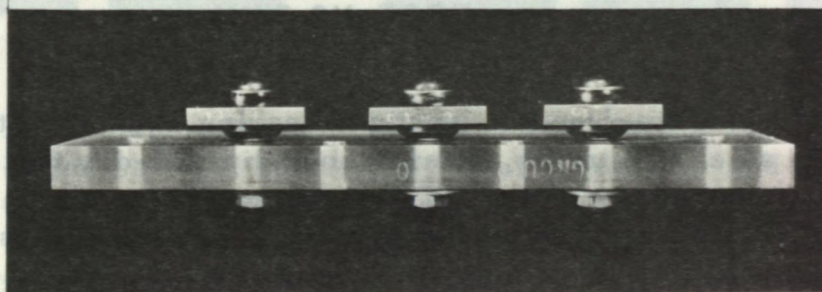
Top view of a Test Panel used in an Automotive-Trim Test.
